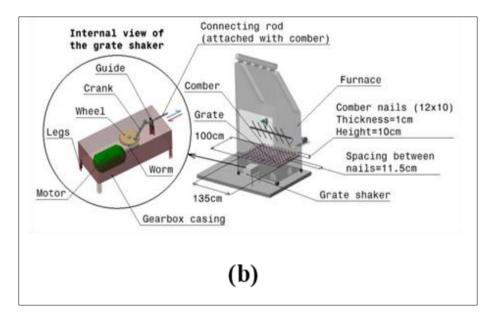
Grate shaker with worm gear and slider crank arrangement and comber
